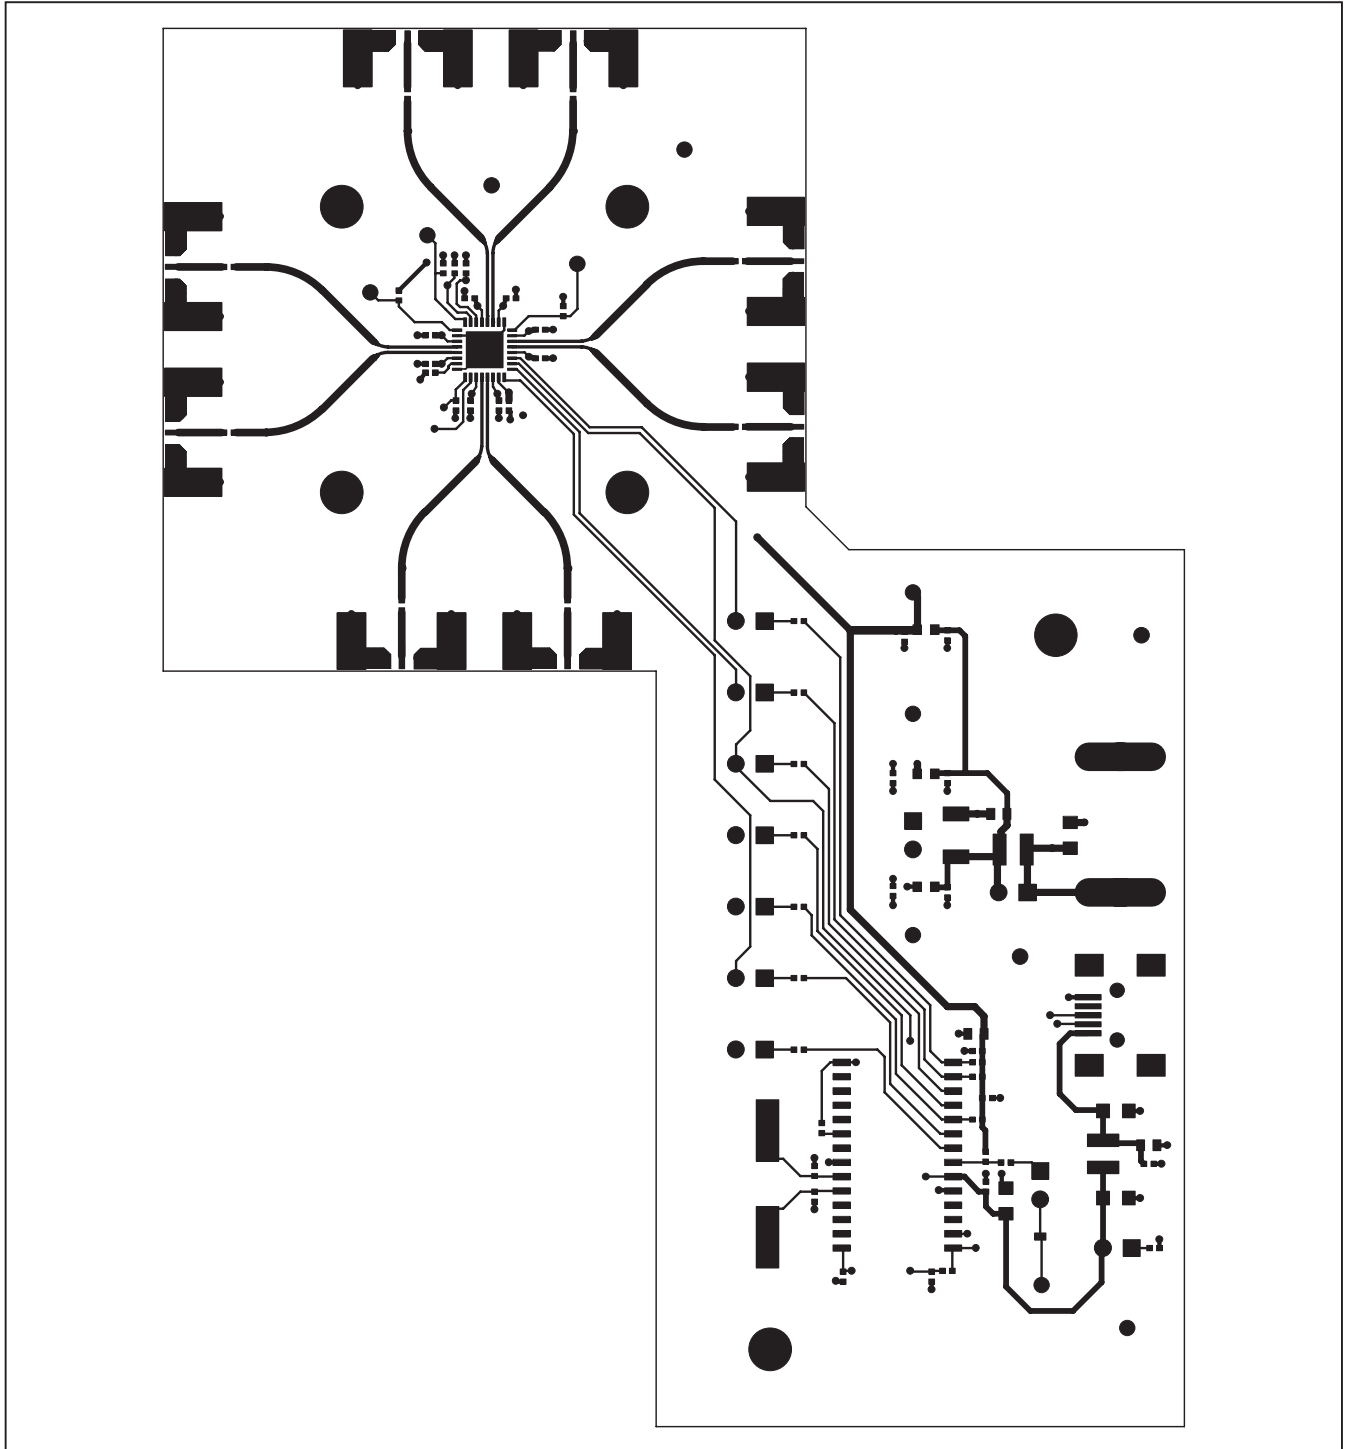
MAX3798 EV Kit PCB Layout—Component Side
